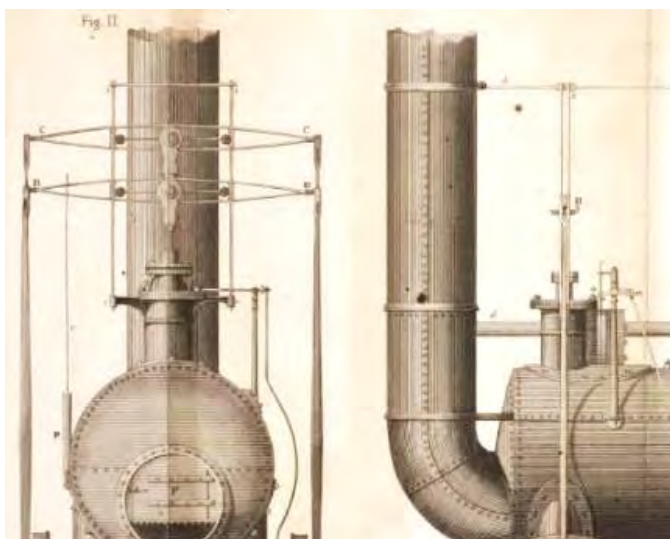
Killingworth-type locomotive cylinder alignment.
